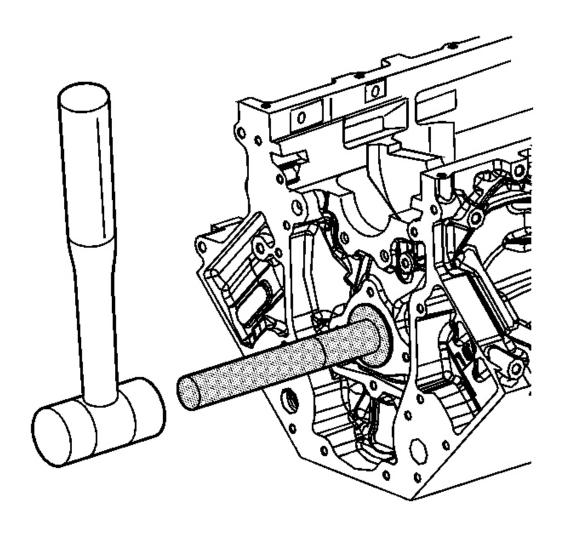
Driving Bearing Out Of Or Into Engine Block Courtesy of GENERAL MOTORS CORP.
